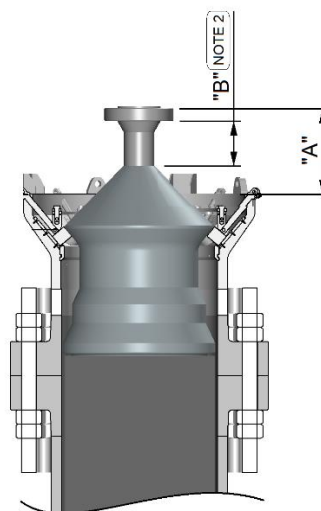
Flange elevation “A” above the top of the Support-Tube, and minimum clearance “B” for subsea flange assembly/ disassembly (Mock-up).
